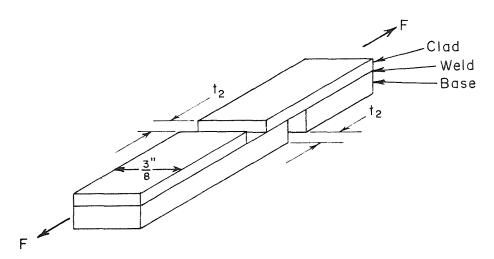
TENSILE-SHEAR SPECIMEN USED TO MEASURE STRENGTH OF EXPLOSIVE WELDS
